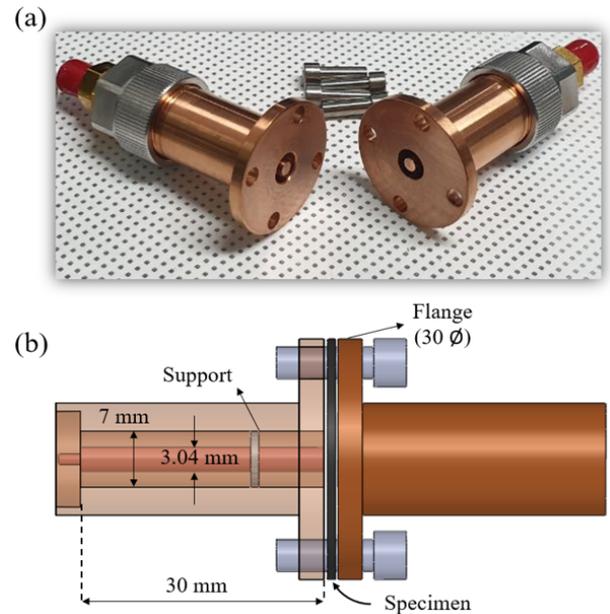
(Color online) (a) Digital photograph of the fabricated flanged coaxial transmission line. (b) Schematic of the flanged coaxial transmission line and a testing specimen.
